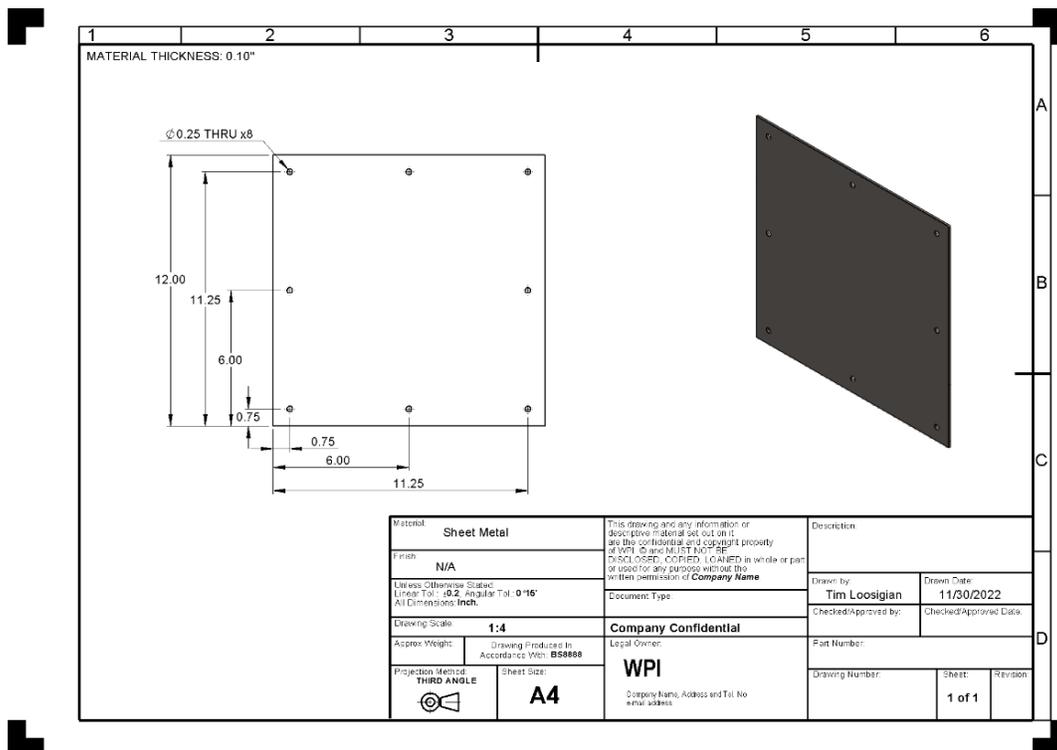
Technical Drawing of 12-in. x 12-in. Sheet Metal cover
